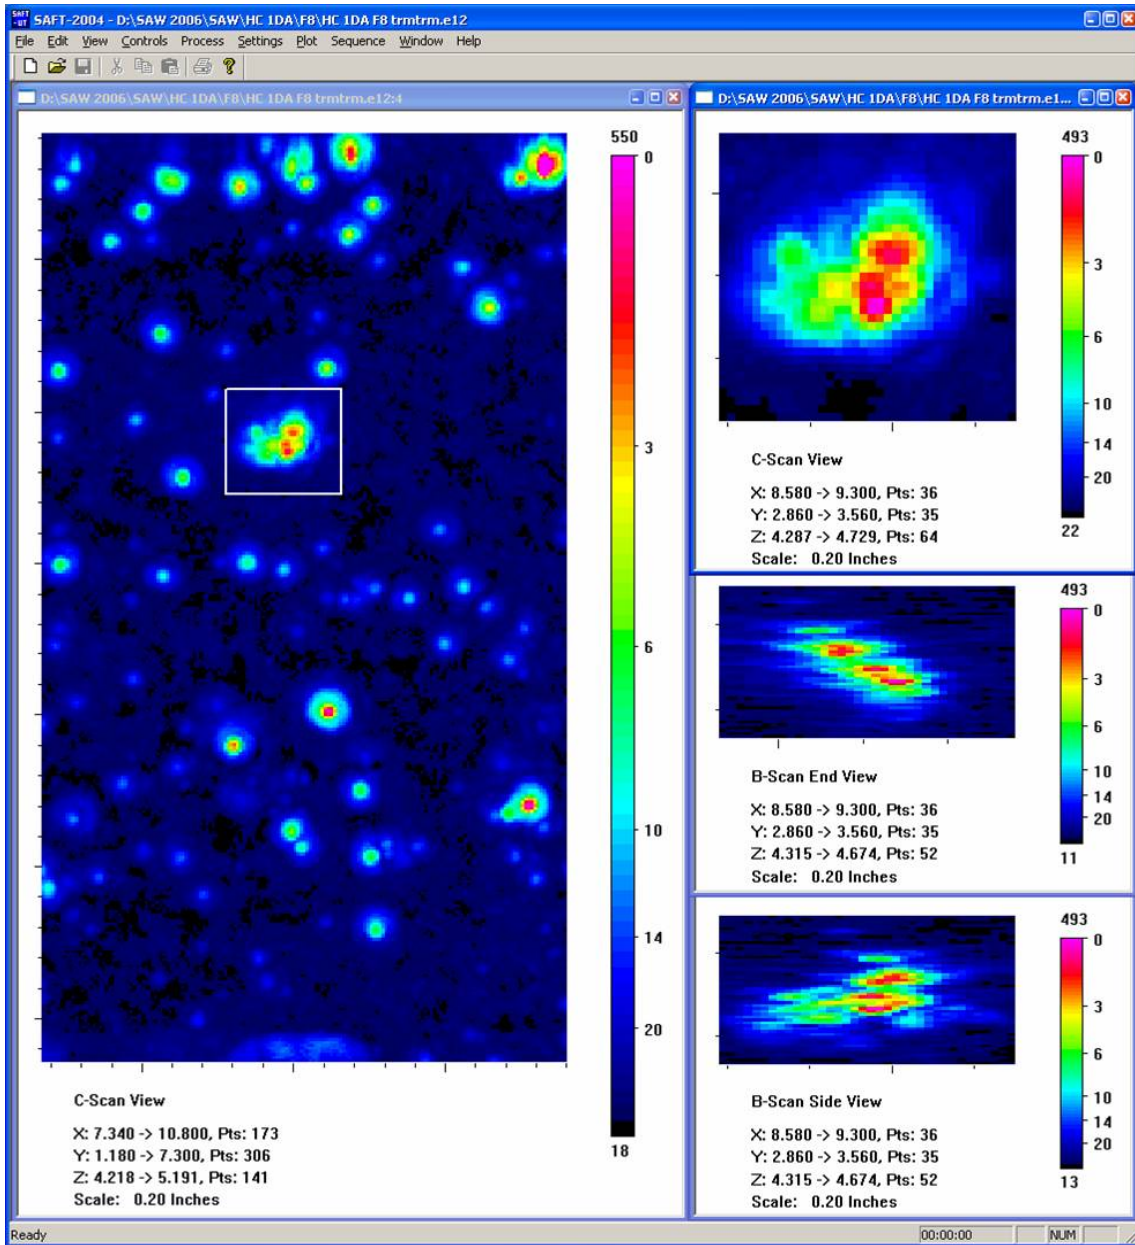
a 10 MHz F8 Immersion Testing Images of Small Fabrication Flaw: HC5B. This figure shows immersion testing data of a complex flaw indication from the weld-normal testing of large weld segments. The flaw indication is identified in the box drawn in the SAFT-UT image on the left in the figure.
